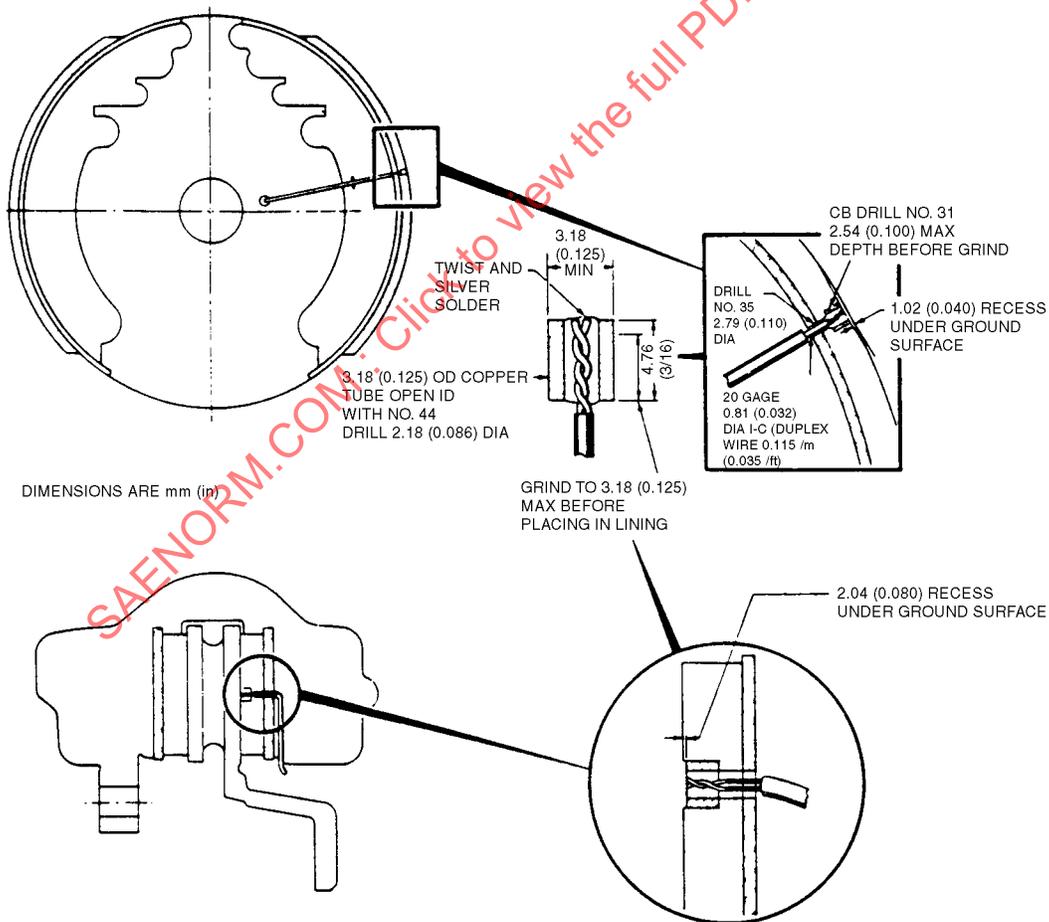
TYPICAL PLUG THERMOCOUPLE INSTALLATIONS
